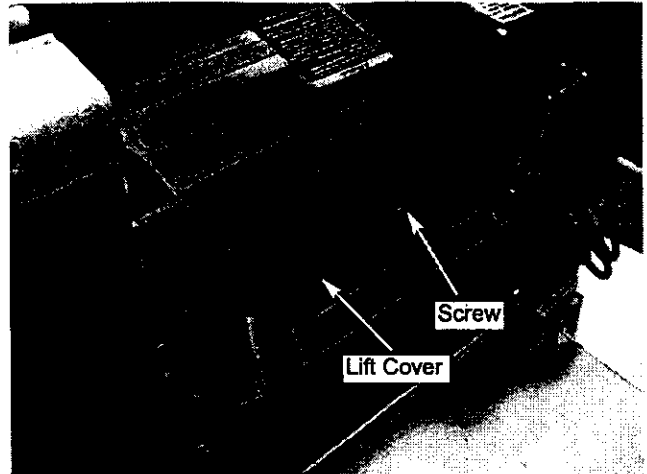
Remove Center Screw, Lift Cover to Access Cutterhead
